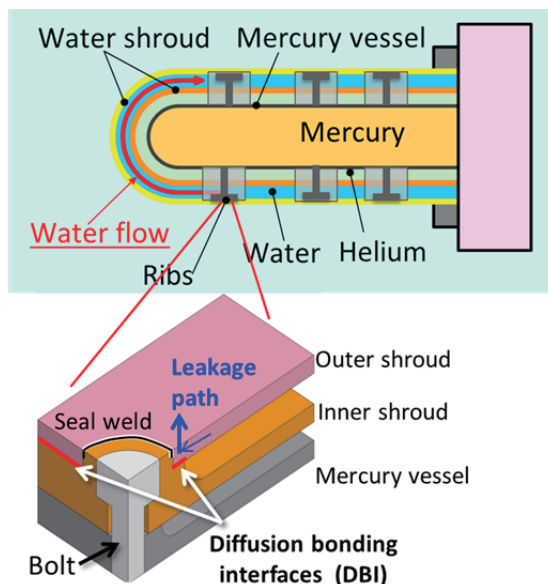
Schematic drawing of the specific location of the failure on the water shroud of the target vessel
